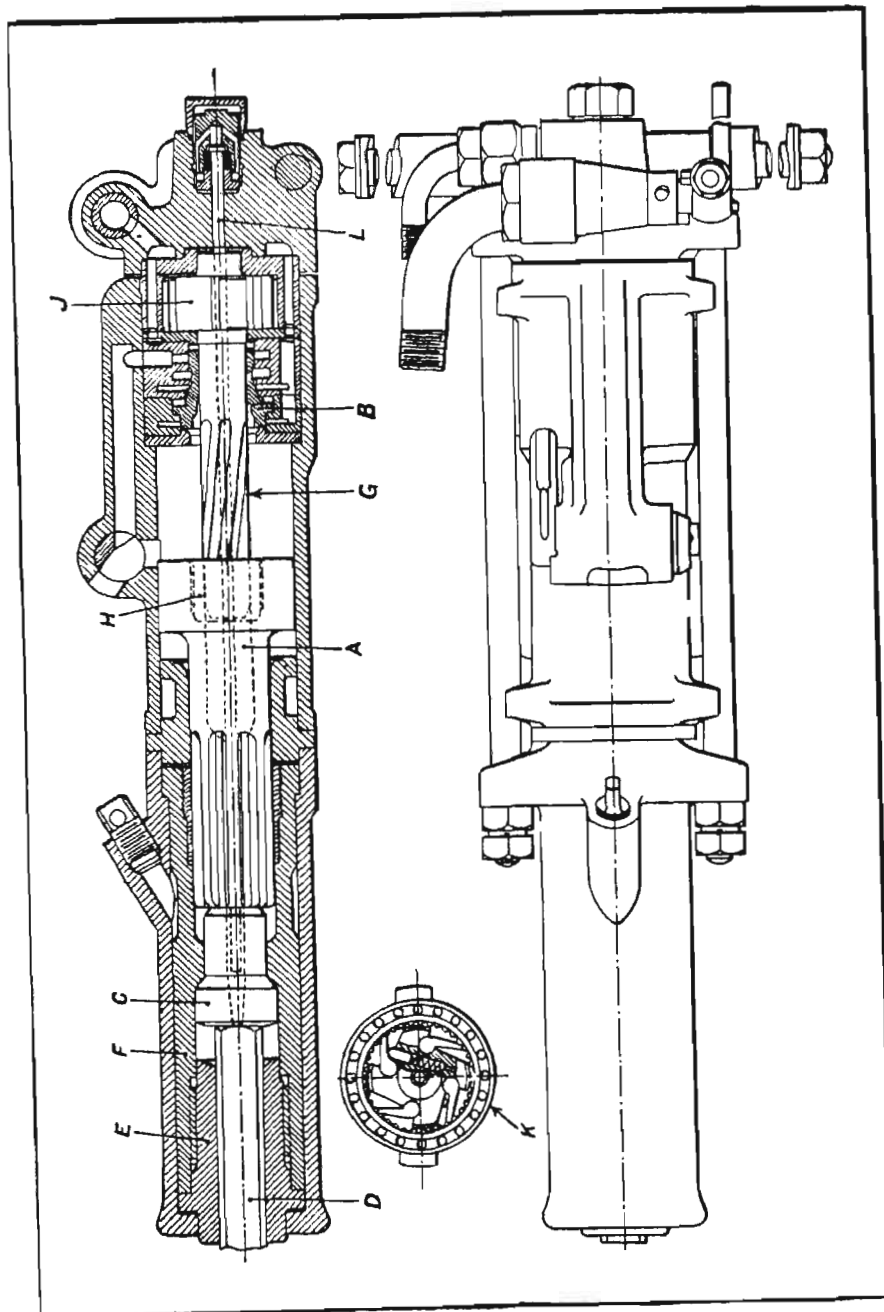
Anvil-block Type Mechanism of Pneumatic Rock Drill.
